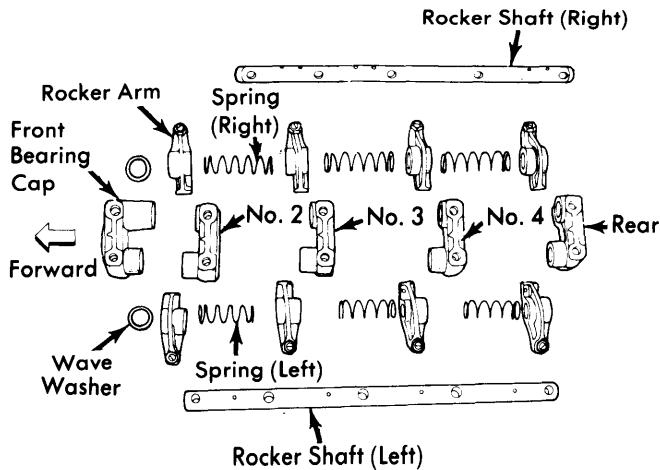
Exploded View of 2000 cc Engine Rocker Arm & Shaft Components.
